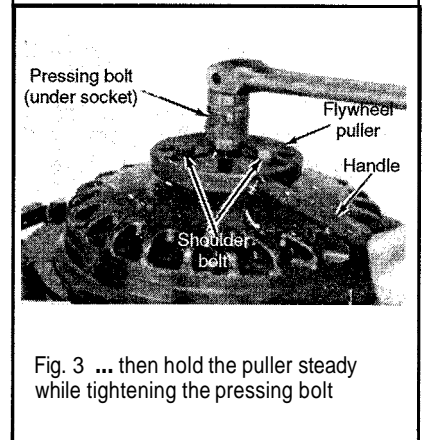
then hold the puller steady while tightening the pressing bolt
